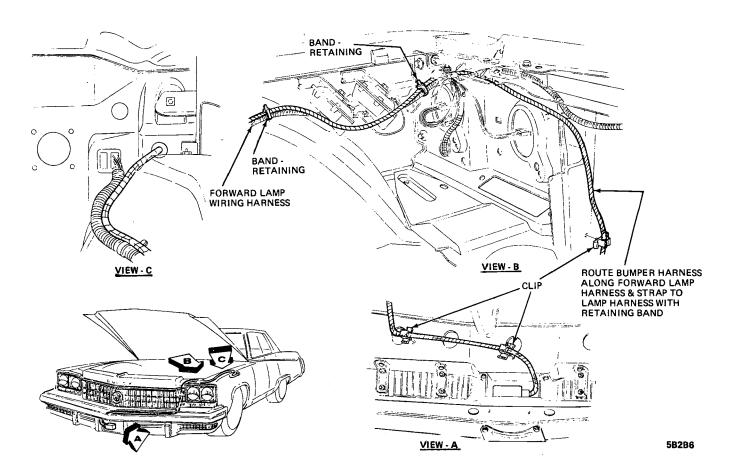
B-6 B-C Series A.C.R.S. Bumper Impulse Detector Wiring
